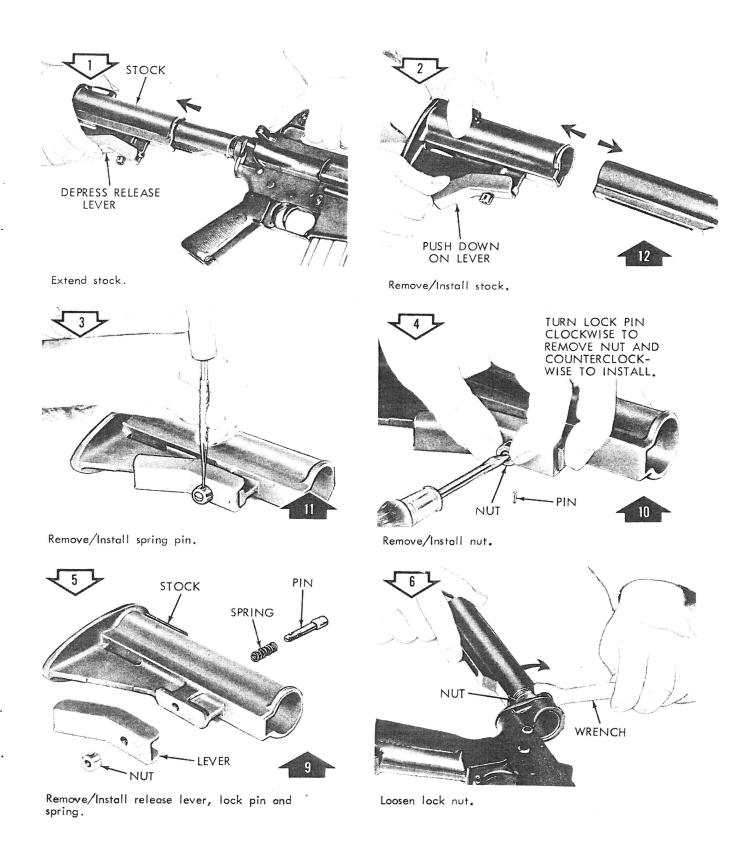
Disassembly/Assembly of Submachine Gun (Sheet 1 of 3)
